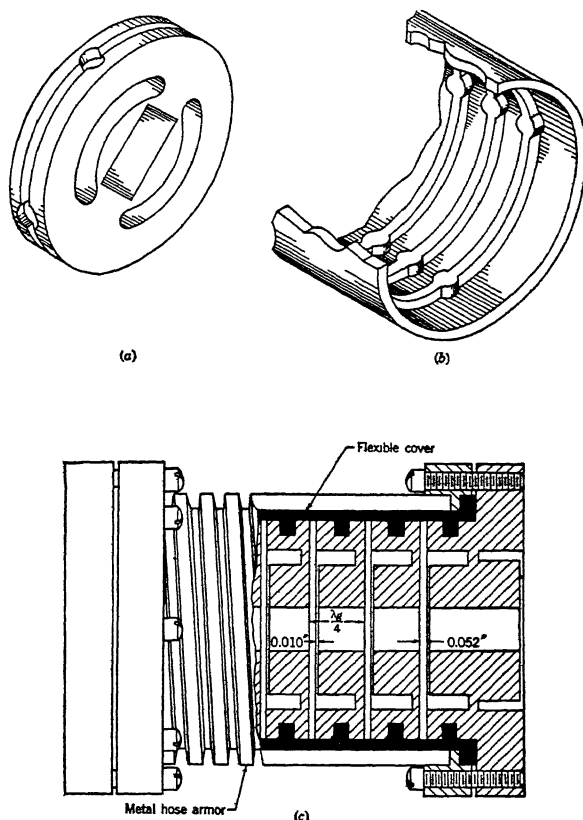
Typical Vertebral Assembly; (a) is a Single Choke Disk; (b) is the Flexible Cover; (c) is the Assembly (Courtesy McGraw-Hill Book Co.)
